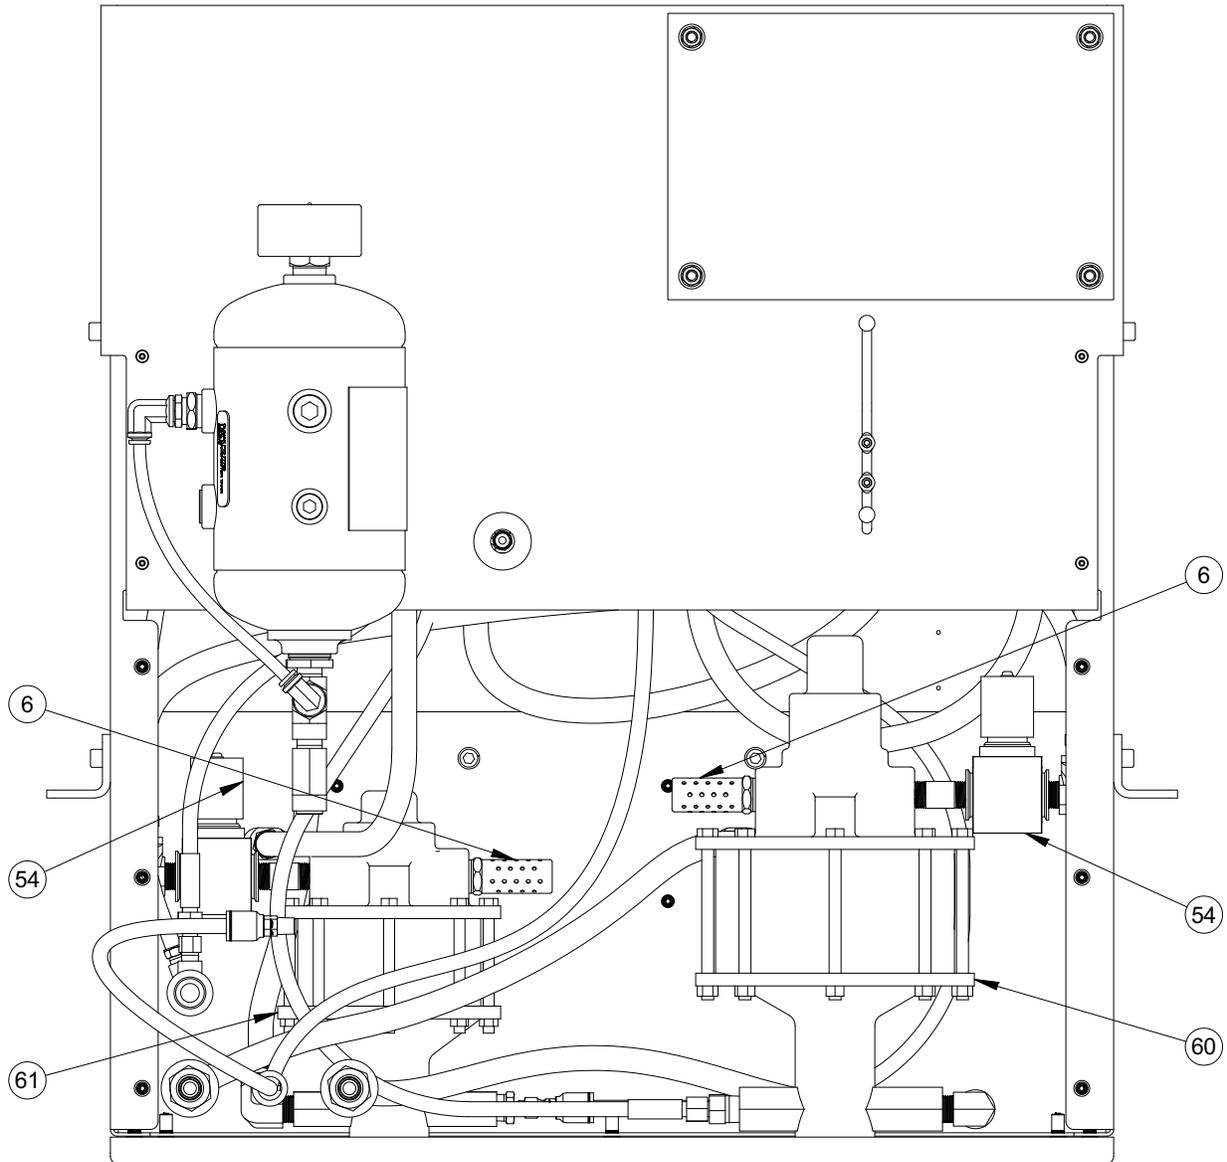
CONSOLE ASSEMBLY FRONT DETAIL (P/N 89417)
